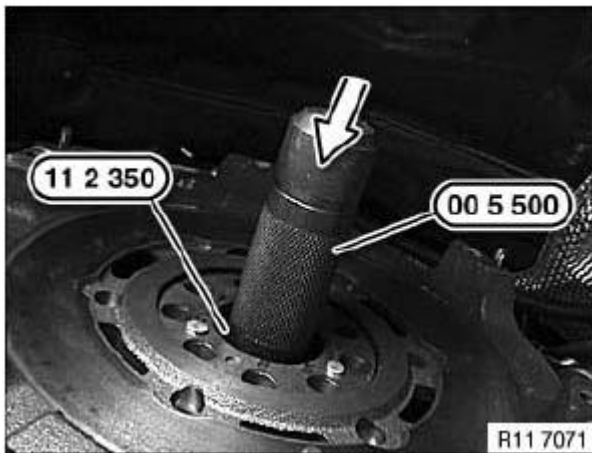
Identifying Special Tool (11 2 350) And (00 5 500)
